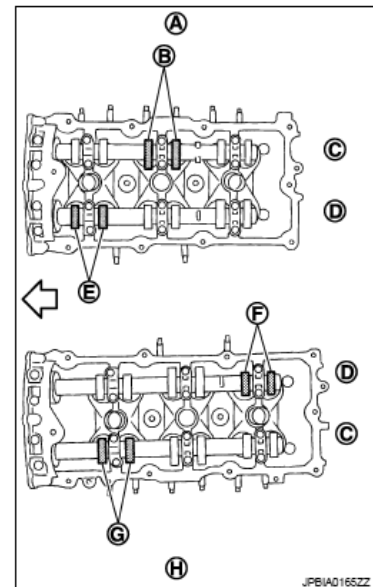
Identifying Intake And Exhaust Valve Clearances
